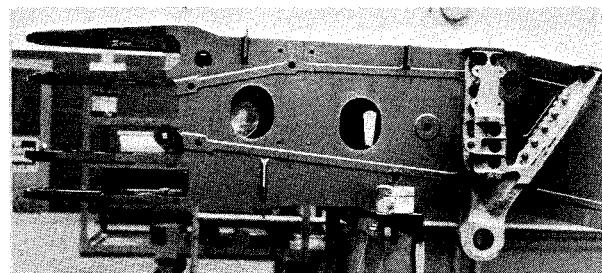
Closeup of final design showing nacelle attachment fitting (note weld lands and weld intersection holes).
